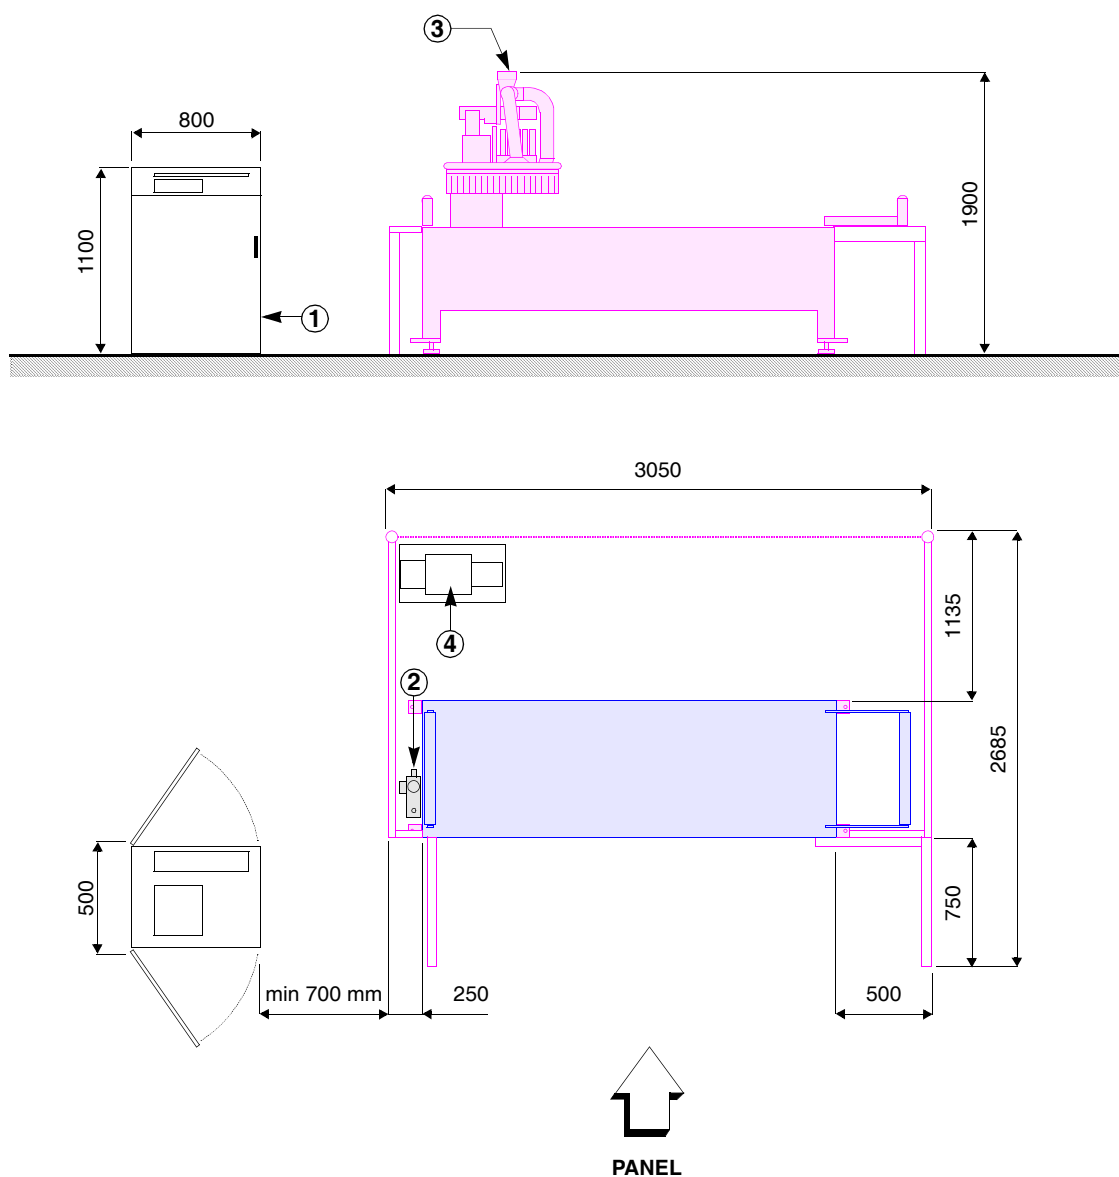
4 Removing and positioning the electrical control cabinet
